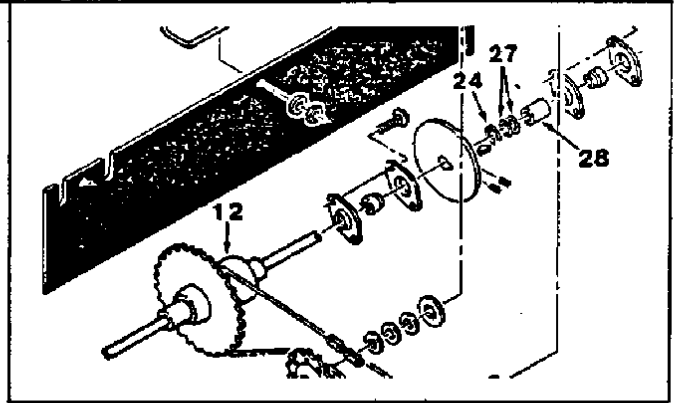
DRIVE CARRIAGF ASSEMBLY
